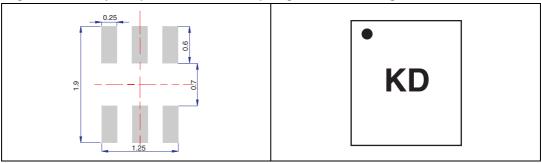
Footprint (dimensions in mm) Figure 21. Marking
